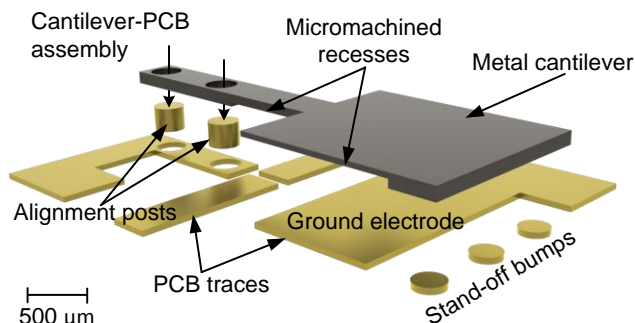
Exploded view of structure showing cantilever relay. Recesses are machined (2 μ m across contact, 8 μ m across electrodes) for DC-contact switching. Gold posts align and hold the cantilever over gold-coated copper traces on the PCB.
